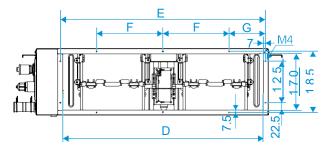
External dimension, air outlet size, and size of fresh air outlet: (unit: mm)
